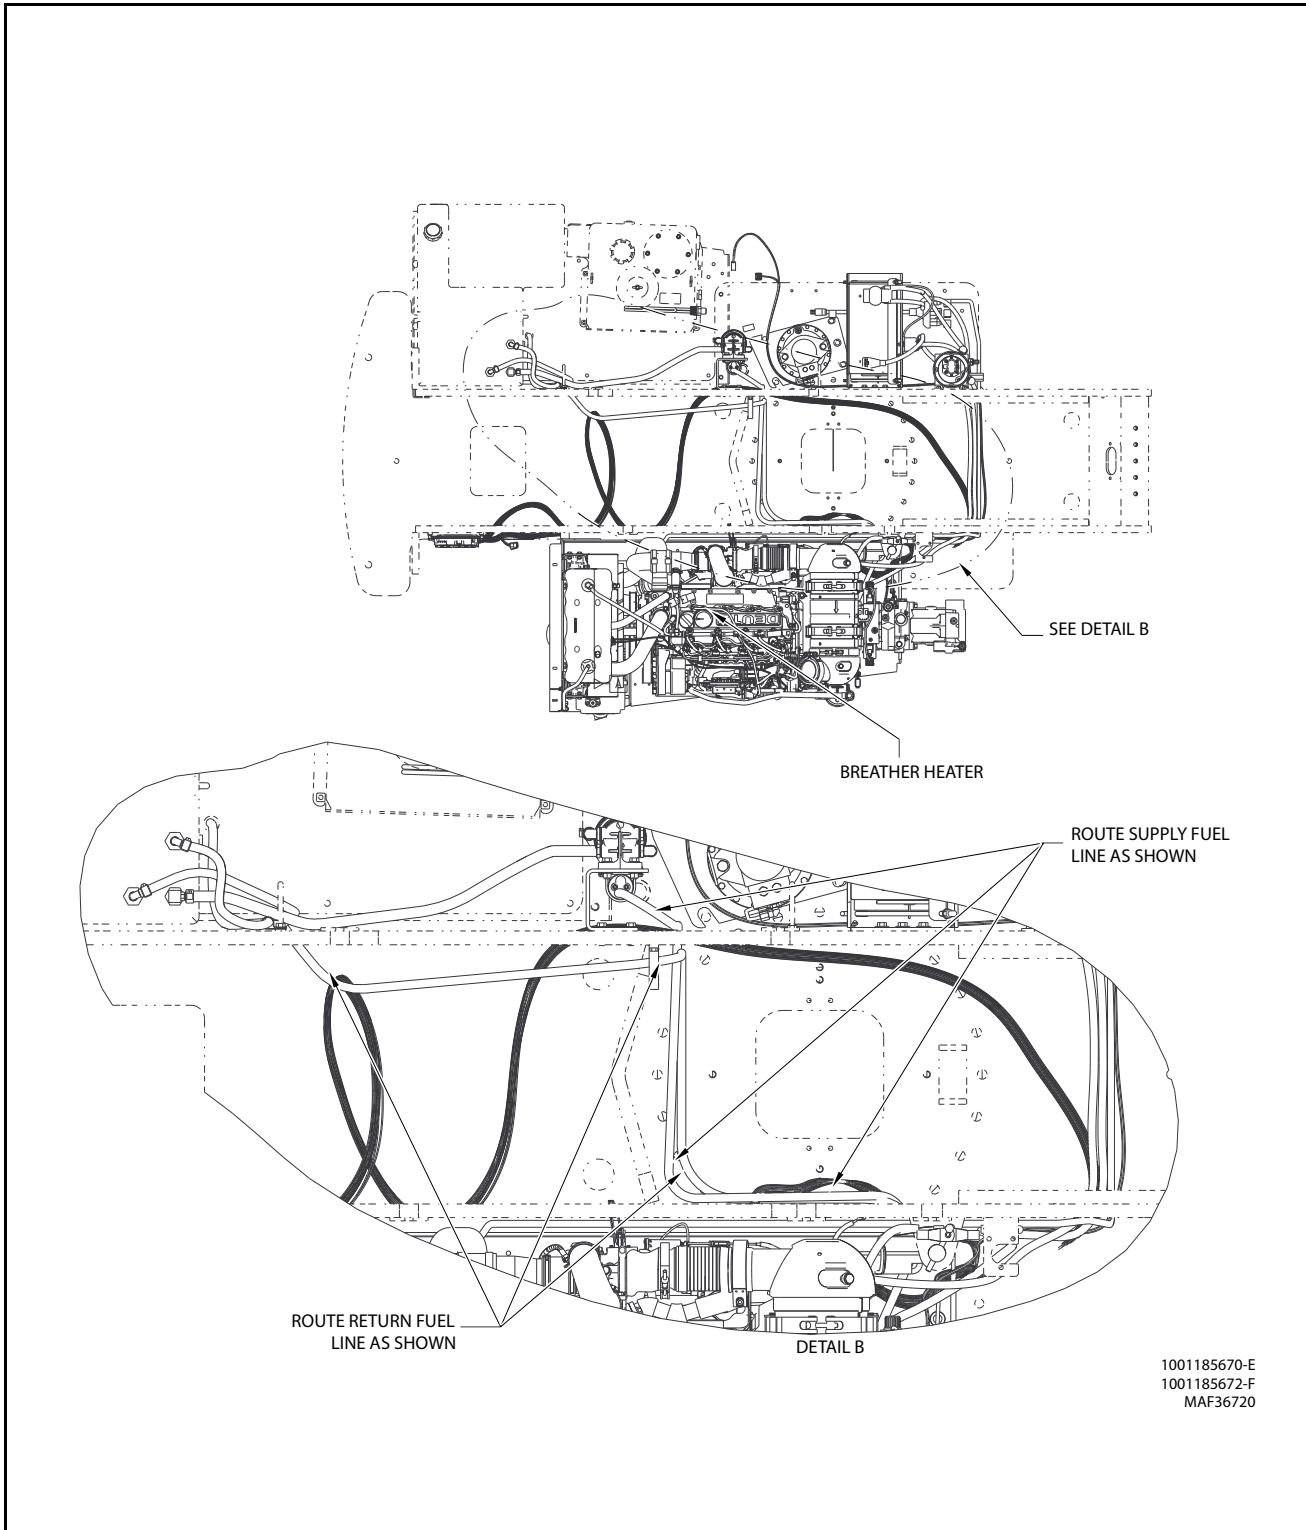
Deutz TD2.9L4 Engine Installation - Sheet 3 of 8
